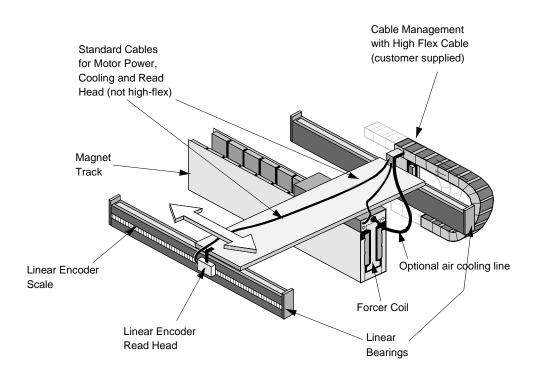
Linear Motor with Tape Scale Encoder and Cable Management
